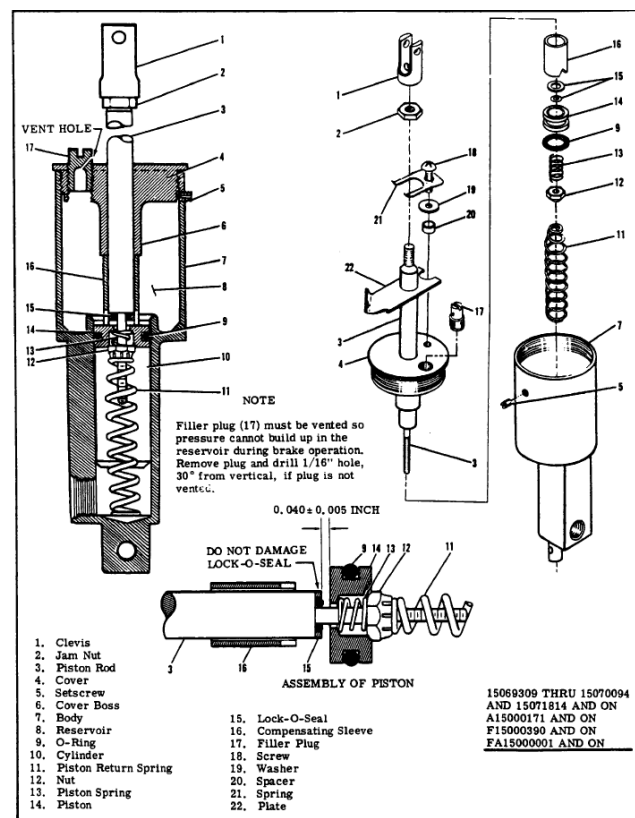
Brake Master Cylinder (Sheet 1 of 2)
